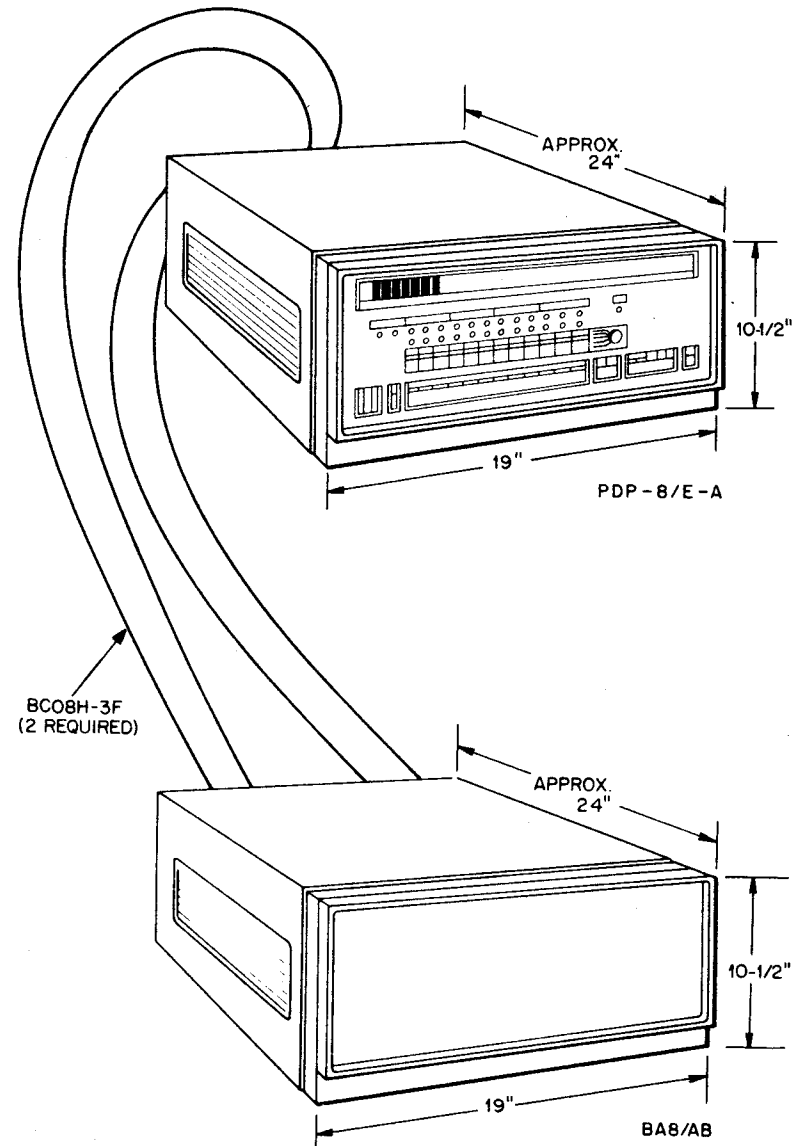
Table-Top PDP-8/E System and Expander Box
